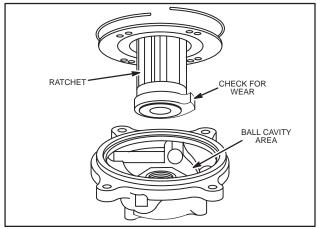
STARTER CLUTCH (OLD STYLE)
